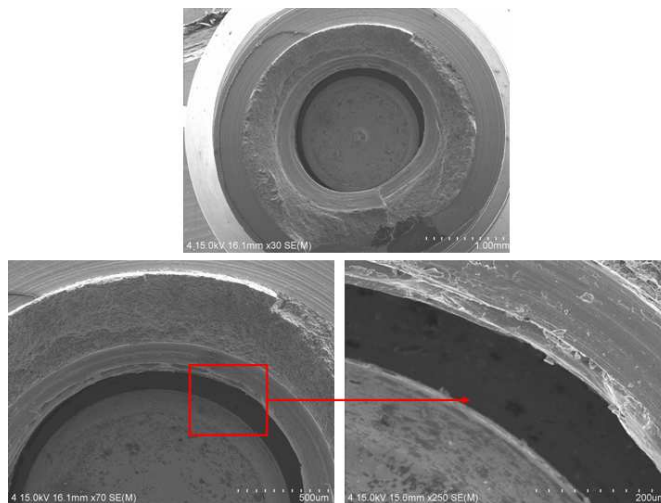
FE-SEM showing fractured WC coated implant system surface after 20 times tightening/loosening and corrosion test.
